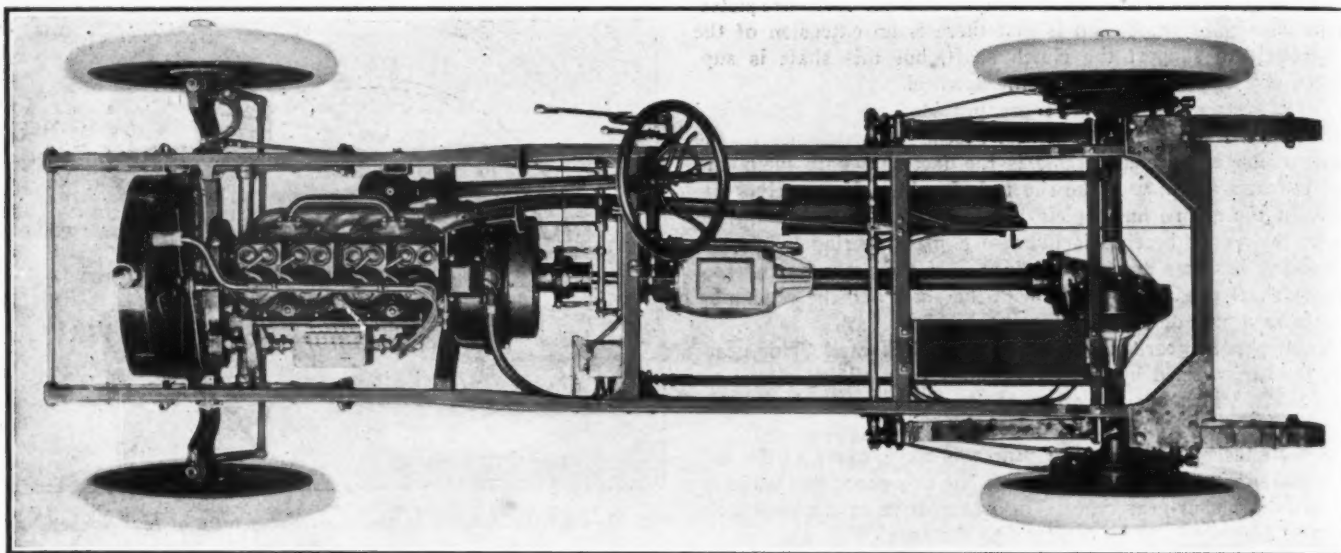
Rambler Cross Country chassis, showing arrangement of torque, drive and suspension members
